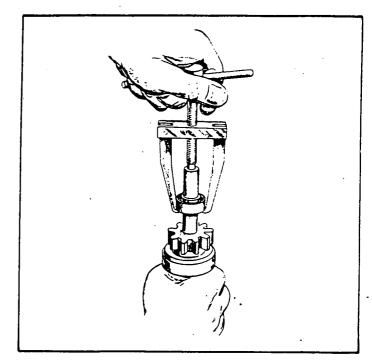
MOUNTING OVERRUNNING CLUTCH
